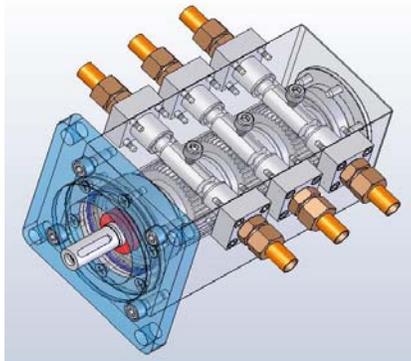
Alternating flow driven hydraulic motor with gear rack conversion mechanism.
